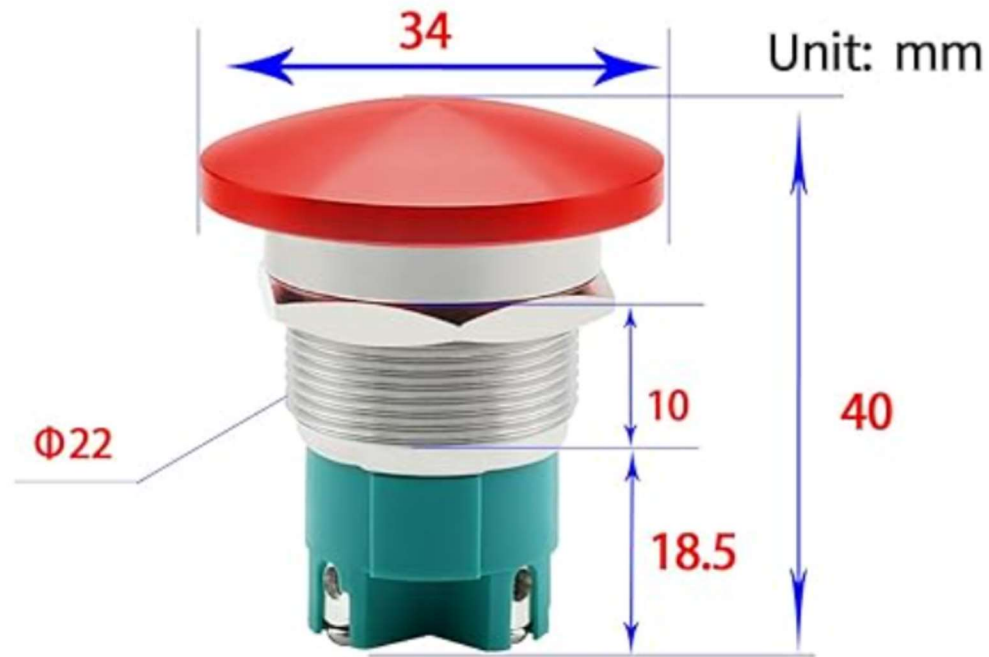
Manufacturing Drawing of part SS#2-P#3- Cancel Button
